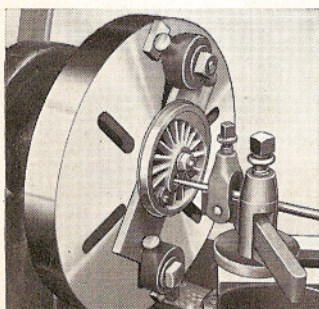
Boring Hub of Wheel in the Lathe for Model Locomotive.
